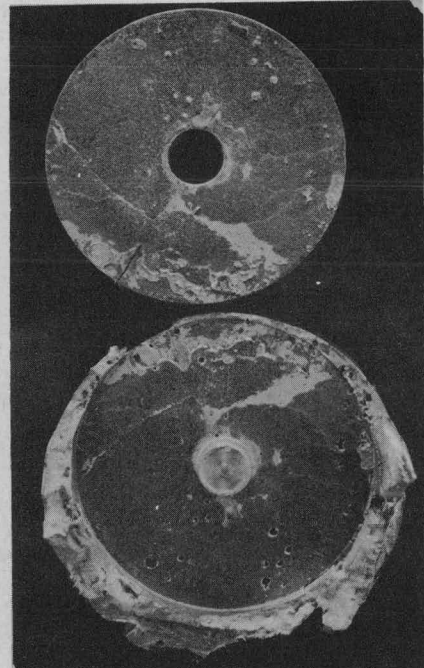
TOP PICTURE SHOWS DEPTH OF CRACK ON BOTTOM END OF SLUG. BOTTOM PICTURE SHOWS CONDITION OF CAST MATERIAL ON THE BOTTOM SLUG END.
